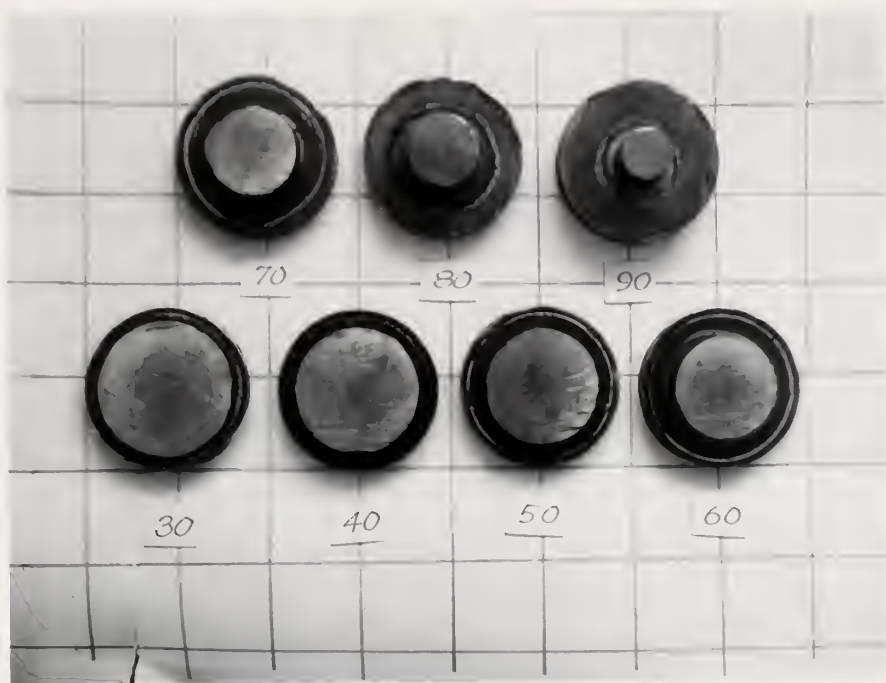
Photograph of Grid Movement in Check for Dead Metal---Extrusion
